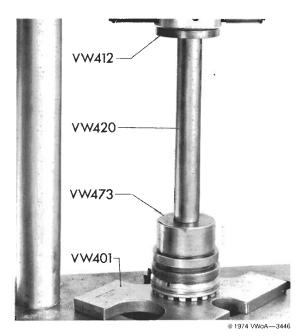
Tapered-roller bearing outer race being pressed into adjusting ring.
